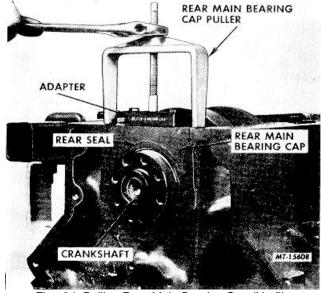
Pulling Rear Main Bearing Cap (No.5)
